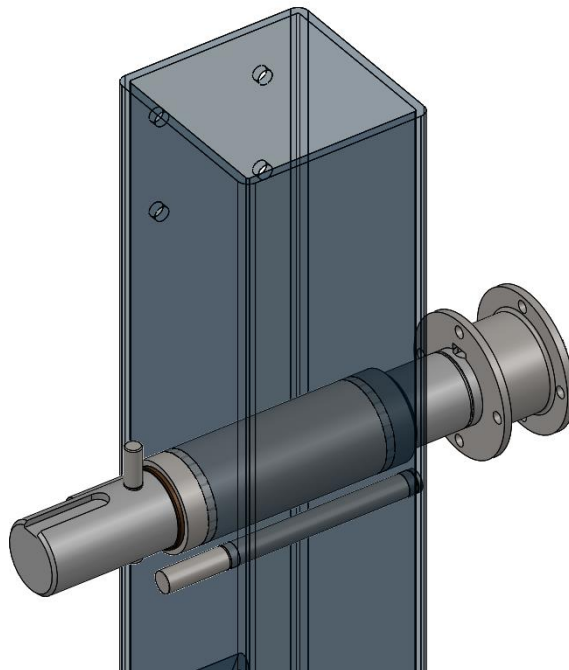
Isometric view of the shaft inserted in the pillar
